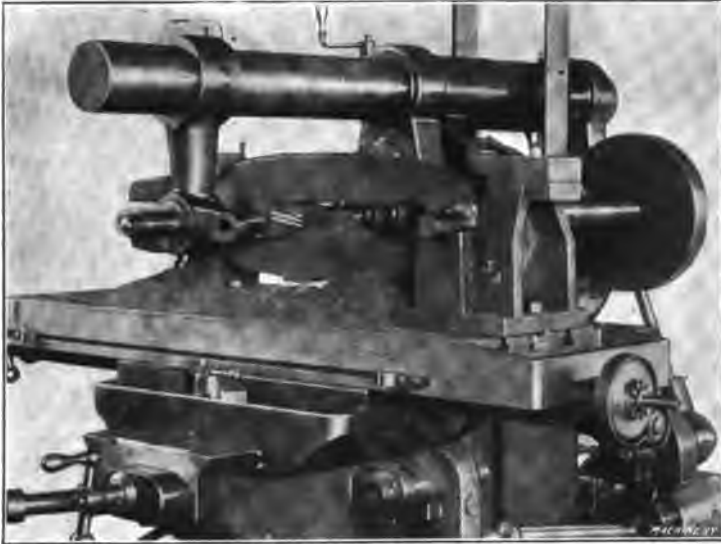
Milling Slot of Crank-shaper Rocker-arm
